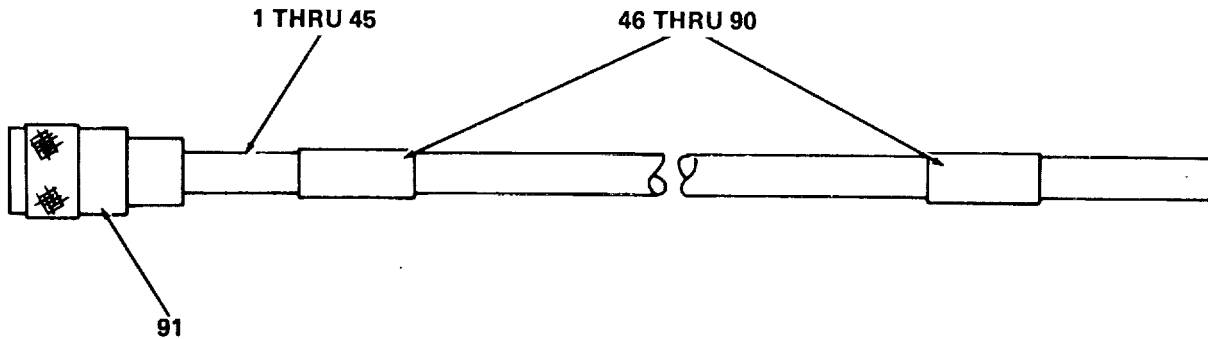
Cable Assemblies 1703-1-3129 (GR1-GR45)
